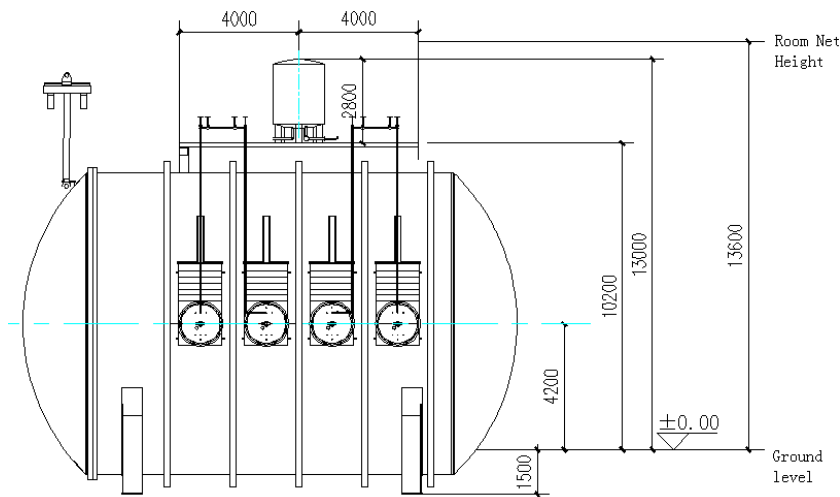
(a) Layout drawing of gravity circulation loop system in front view
